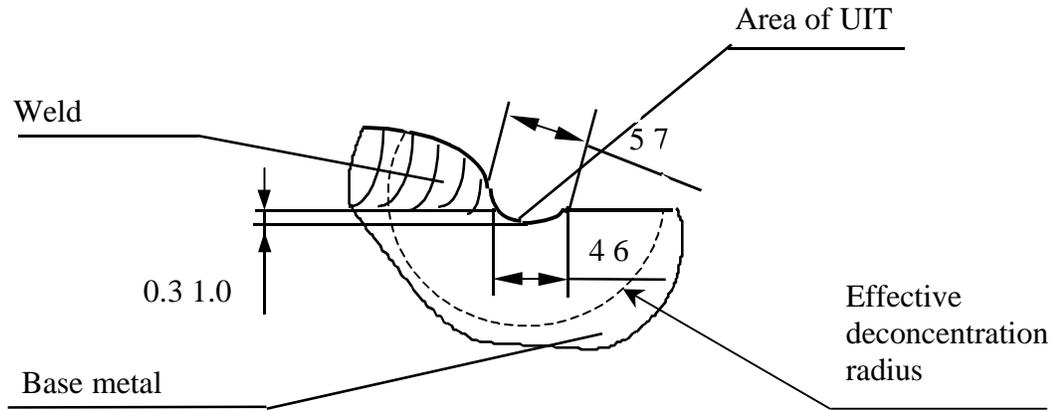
Recommended groove profile after UIT, specifically for medium strength steel welded joints
